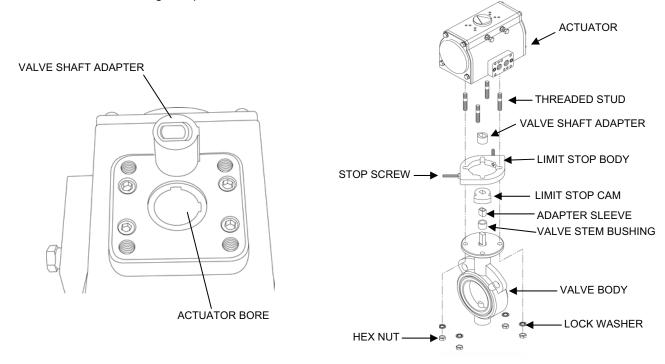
Valve Shaft Adapter and Adapter Sleeve Installation.
